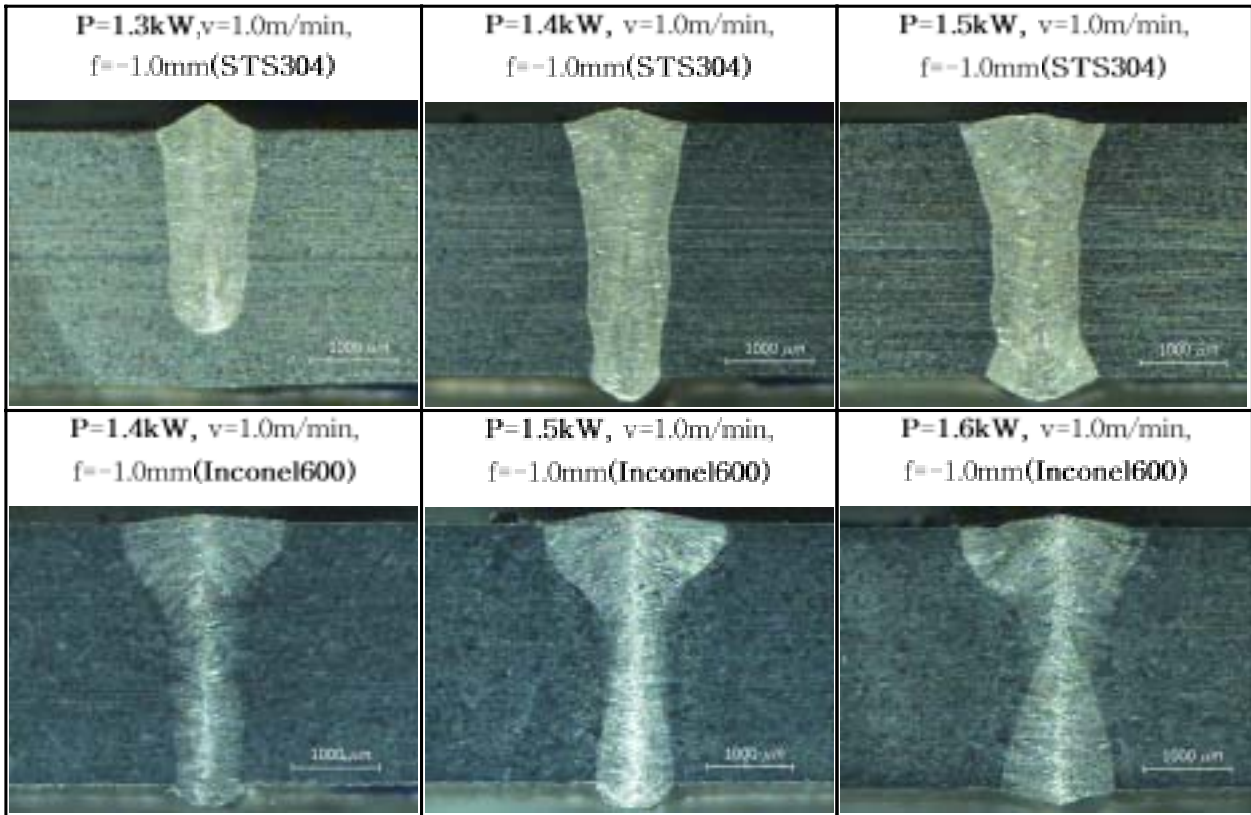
Welding Cross-section of the laser beam power(STS304, Inconel 600)
